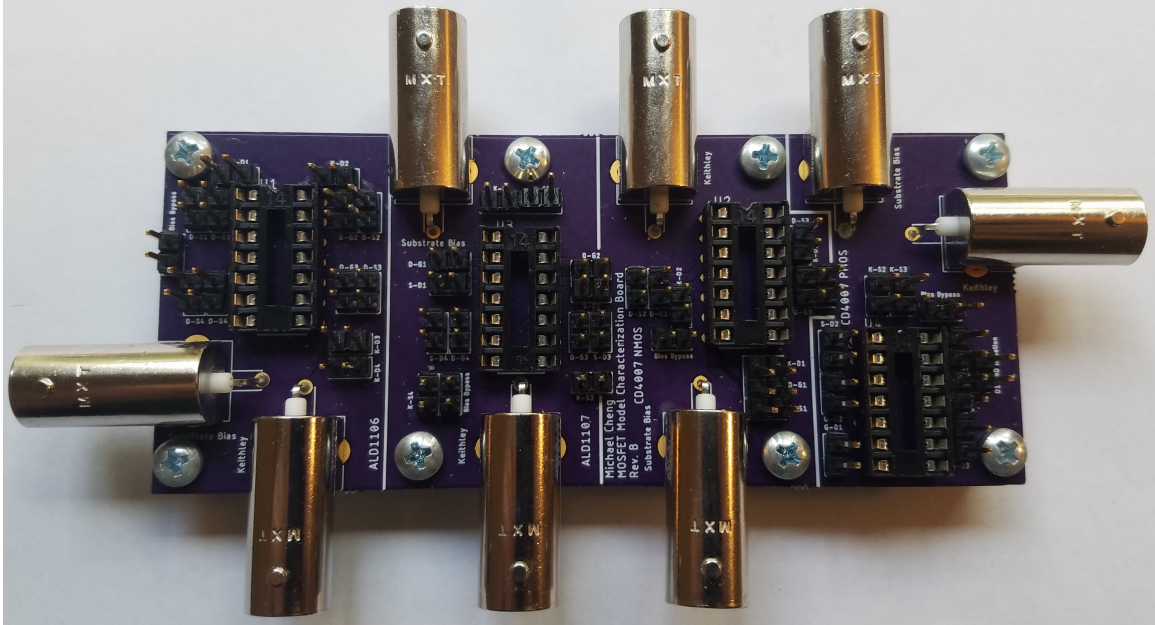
Top Side of Populated PCB with Arrays and Jumpers Removed
